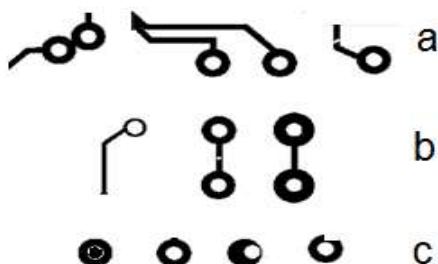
Three types of defects: short and open (a), sizes and inner defects (b), extra or lacking metal (c)
